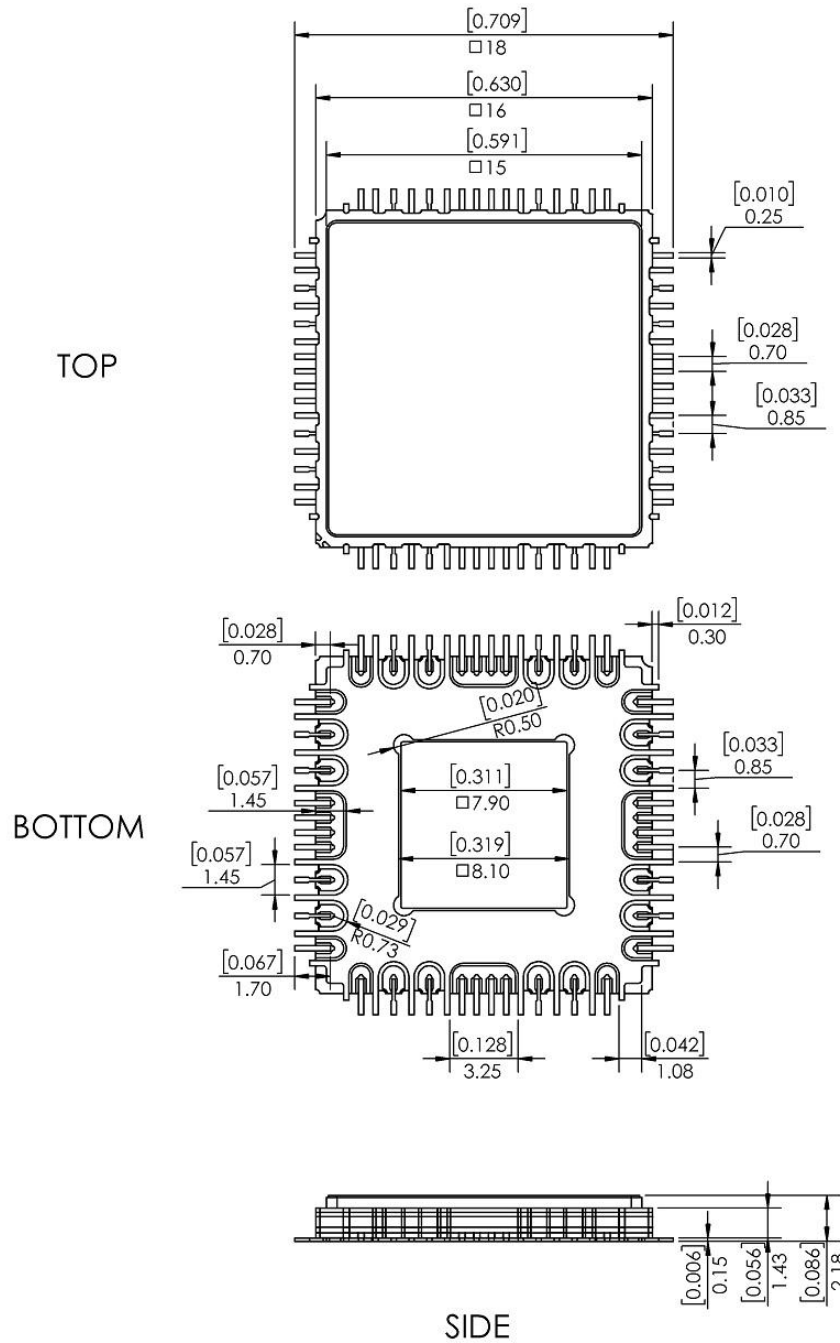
CQFP 64-Pin Package Drawing (All Dimensions in mm)
